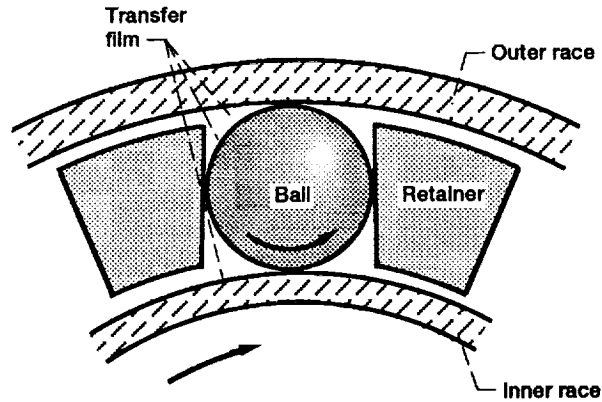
Illustration of ball bearing film-transfer mechanism (Ref. 14).
